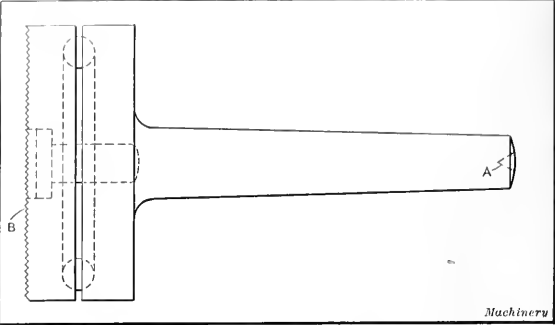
Auxiliary Tailstock for supporting Work in a Lathe with Worn Spindle Bearings
